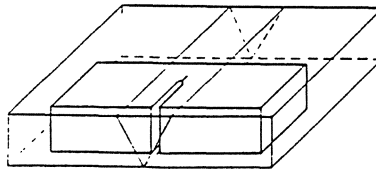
Three-point-bend specimen and it's orientation in the welded joint.
